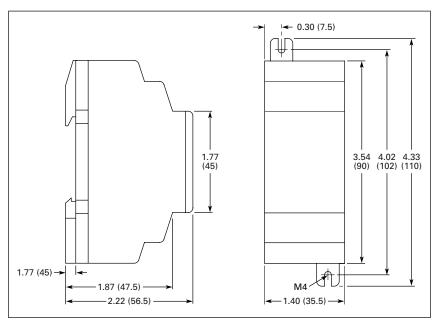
EZ256-HCI Dimensions in Inches (mm)
